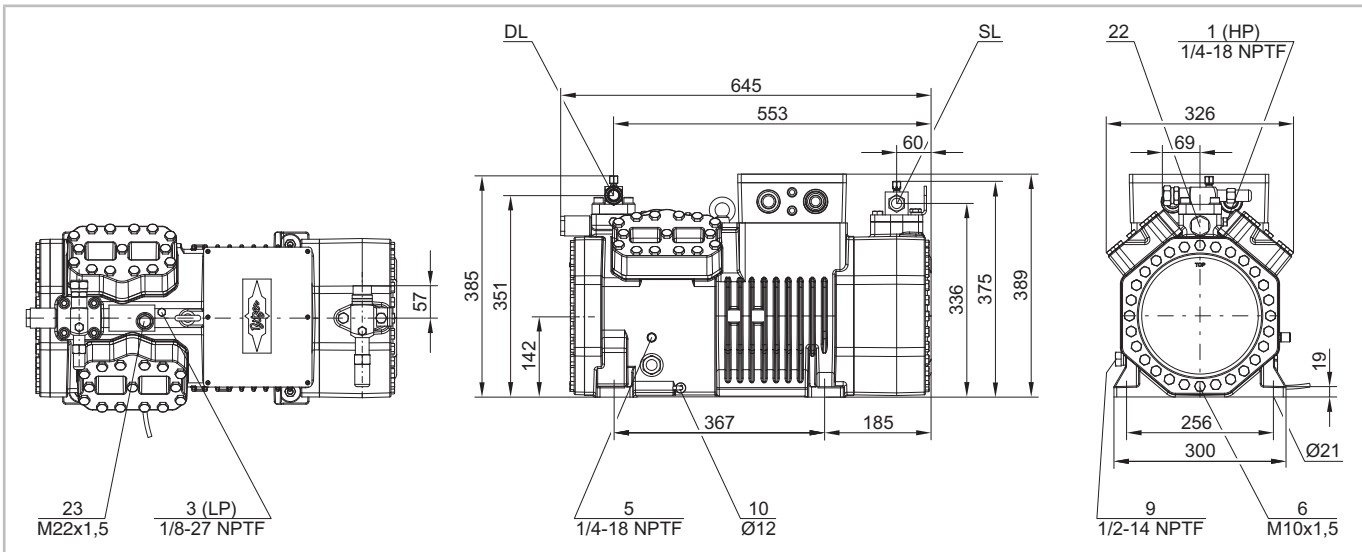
Dimensional drawing 4FTC-30(L)K .. 4CTC-30(L)K
